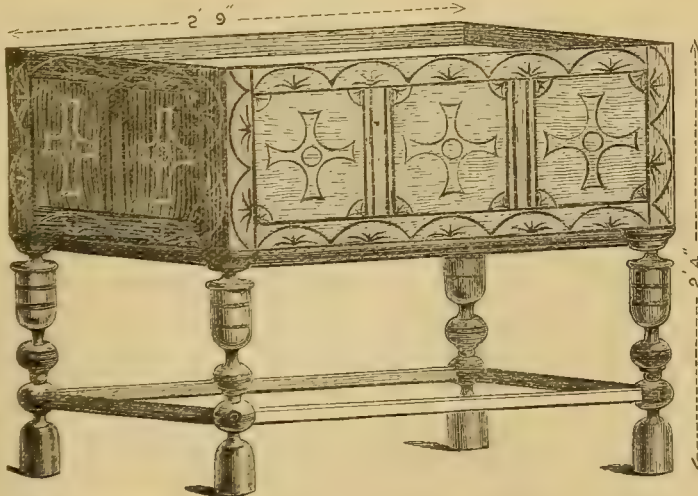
SMALL CARVED OAK CHEST ADAPTED TO FORM FLOWER STAND.
